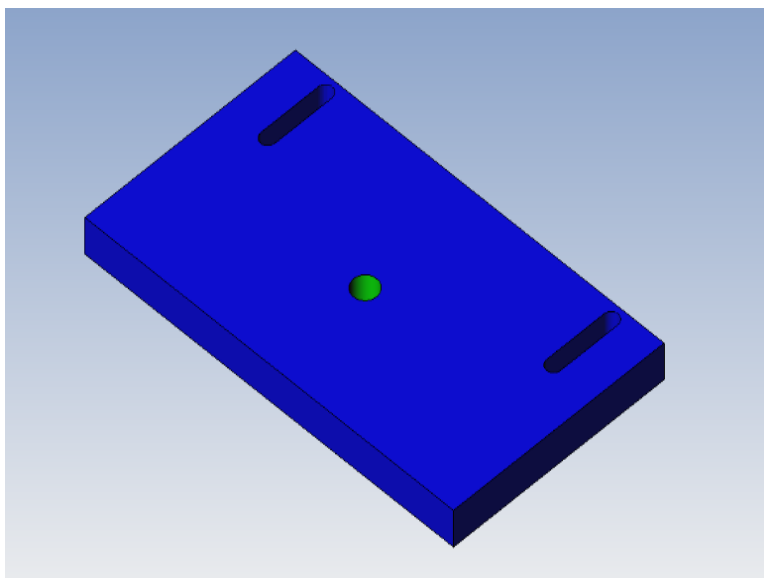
Testing Device Tangential Force Plate Workpiece with center hole
